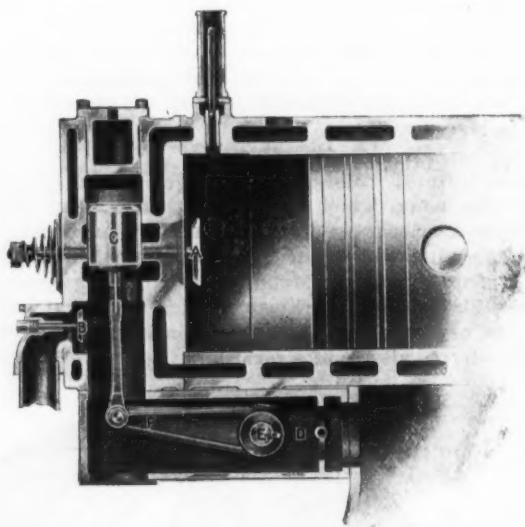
Section of Cylinder Head and Air Box, Showing Valves.
